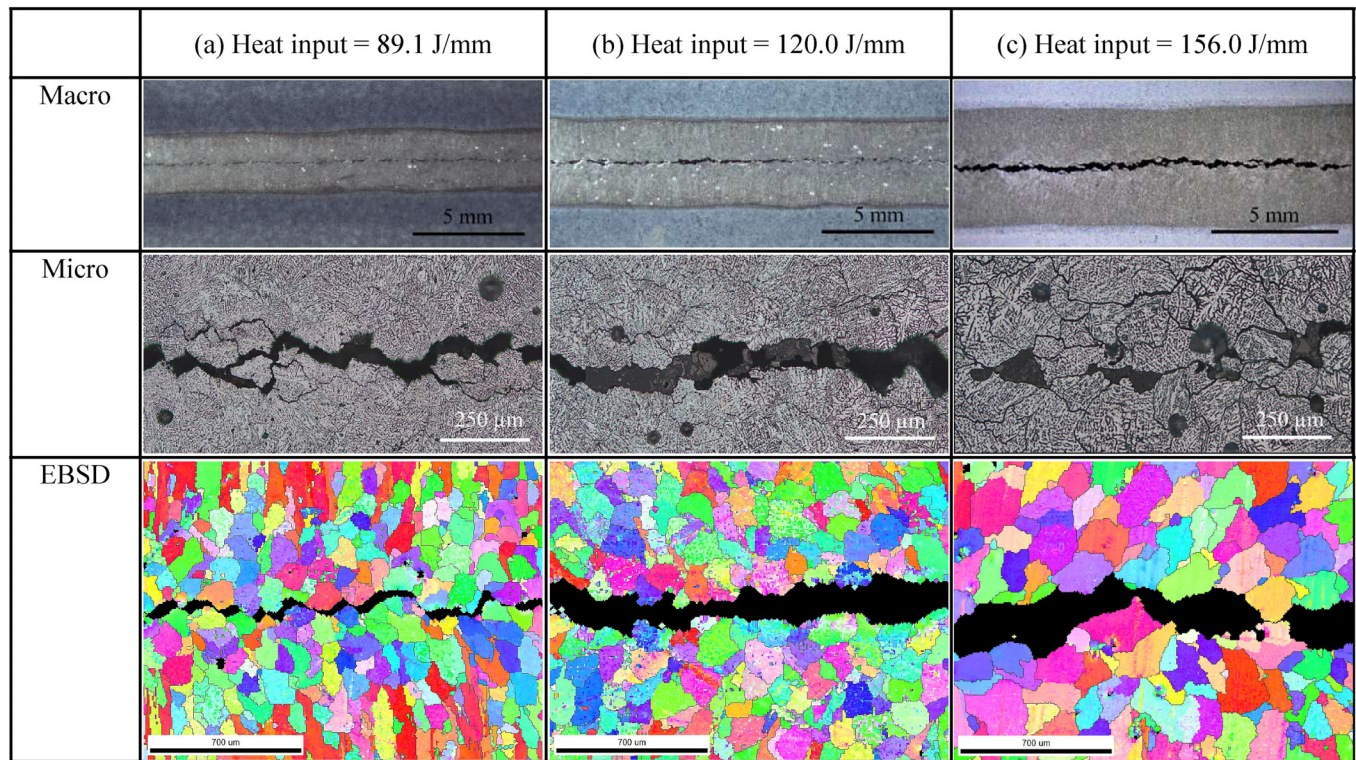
Magnified weld bead surfaces and their EBSD images.
